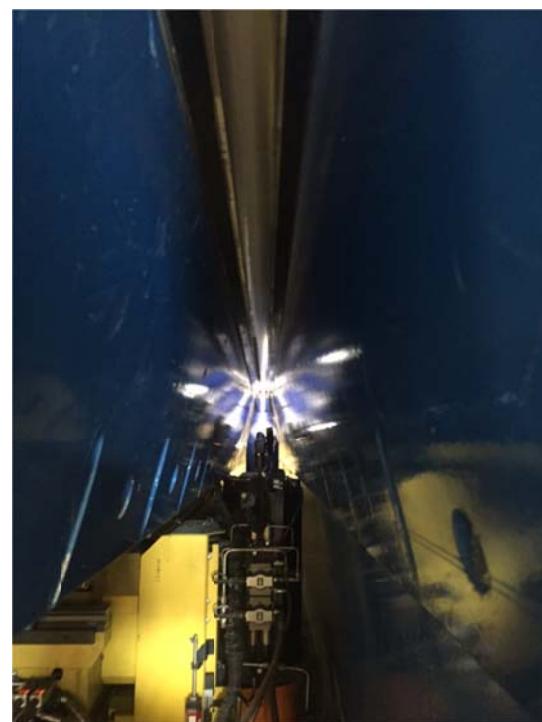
Bottom Plate Friction Stir Welding
